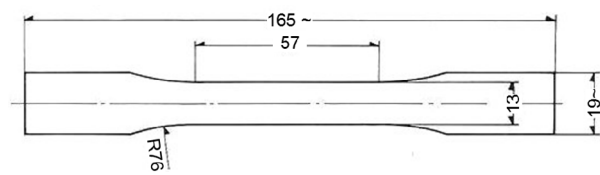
Tensile test specimen of ASTM D 638 TYPE I
